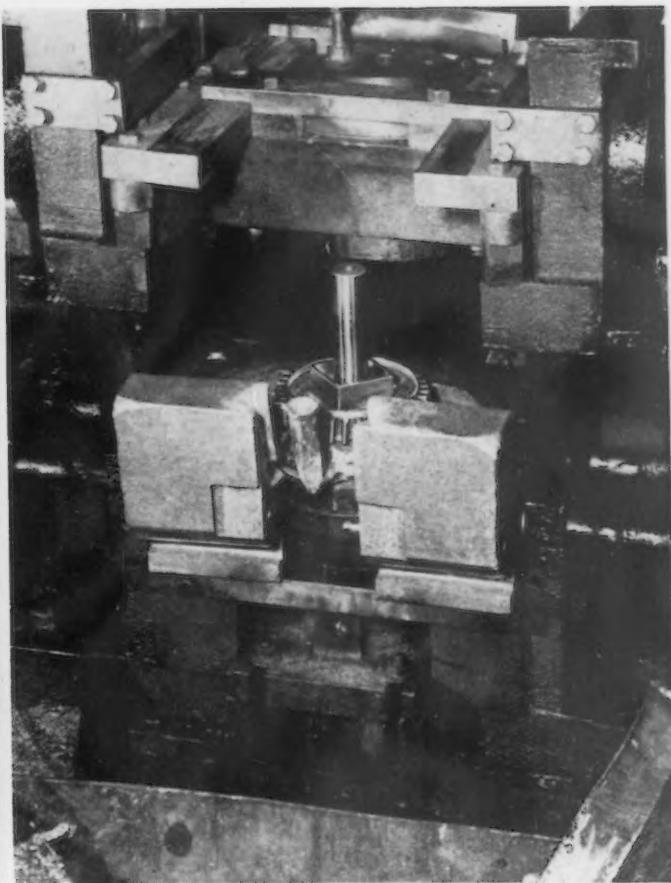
Gear with a steel insert, ready for removal from the mold. The shaft insert has key-like slots into which the molten metal flows to secure the insert to the casting.
